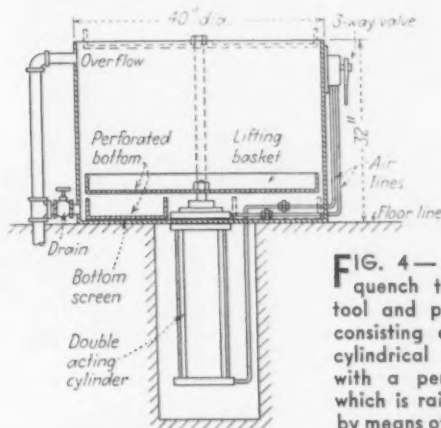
An efficient quench tank design for tool and production work, consisting essentially of a cylindrical tank provided with a perforated basket which is raised and lowered by means of an air cylinder.
